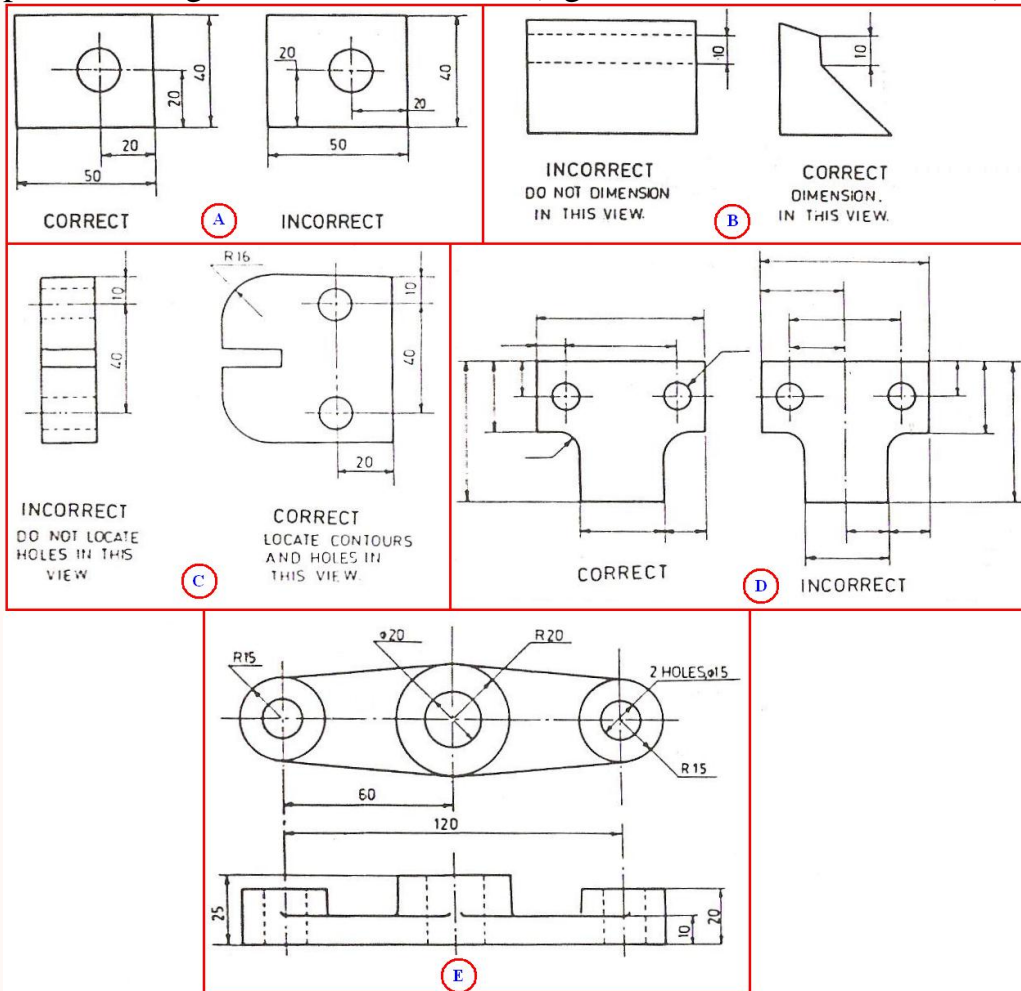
(a) Dimension should be placed outside the view.(b)Dimension should not be taken from hidden lines.(c)Location of the position of holes.(d)Dimensioning to the center line of an object be avoided.(e) Dimensioning to the center line of a hole is permitted.
